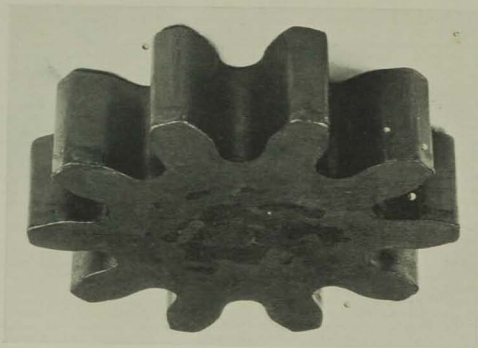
Gear Wheel of $7\frac{1}{2}$ inches diameter, cut from 2-inch Steel Plate by Oxygen-Acetylene Machine in 7 minutes.
